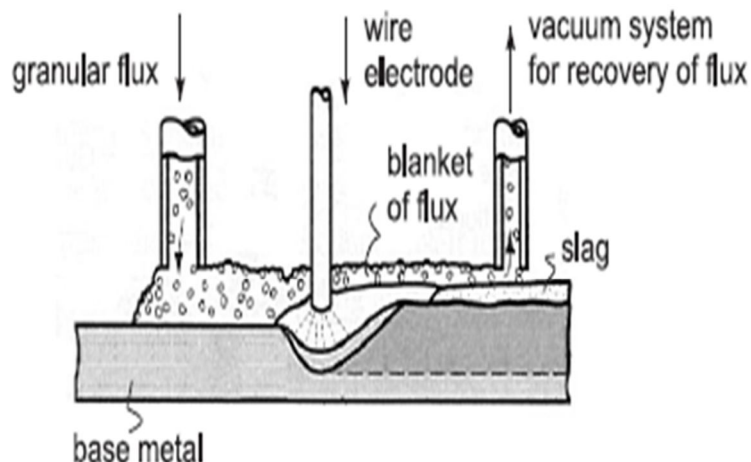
Diagram Of Submerged Arc Welding Equipment[13]
